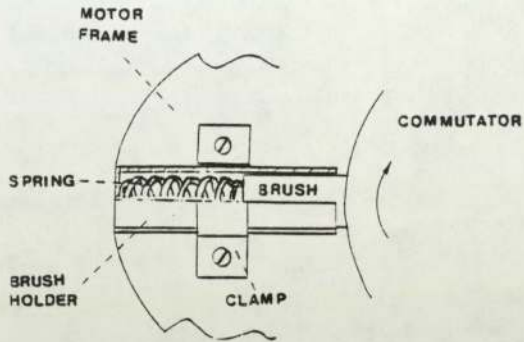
Typical brush mounting arrangement in small a.c. commutator motors
